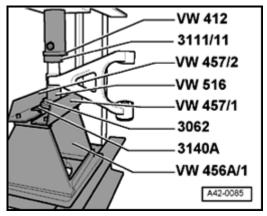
Pressing bonded rubber bushing out of upper control arm
